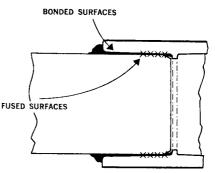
Bonded and Fused Surfaces of Joined Pipe
